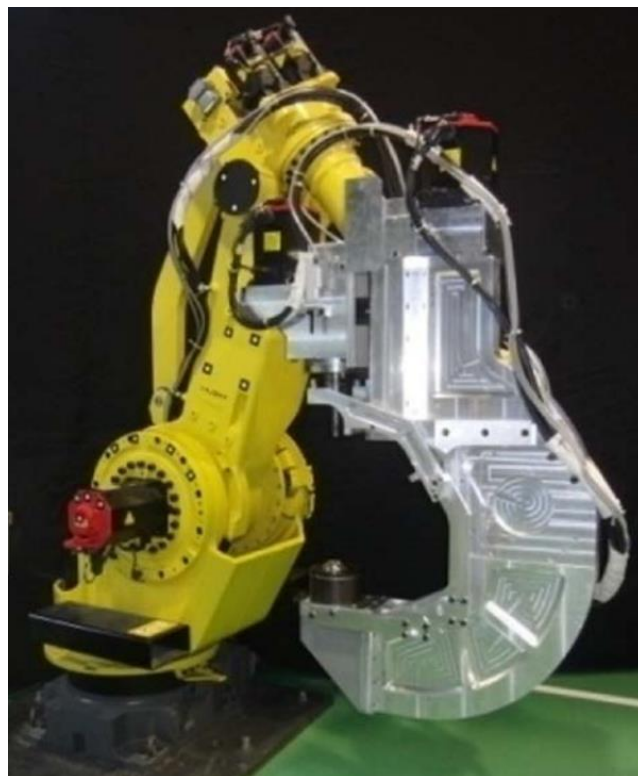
Fanuc M-700 with C-type FSW gun [2].
